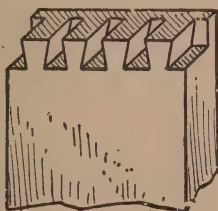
Finished Sockets for Double Lap Dovetail Joints
